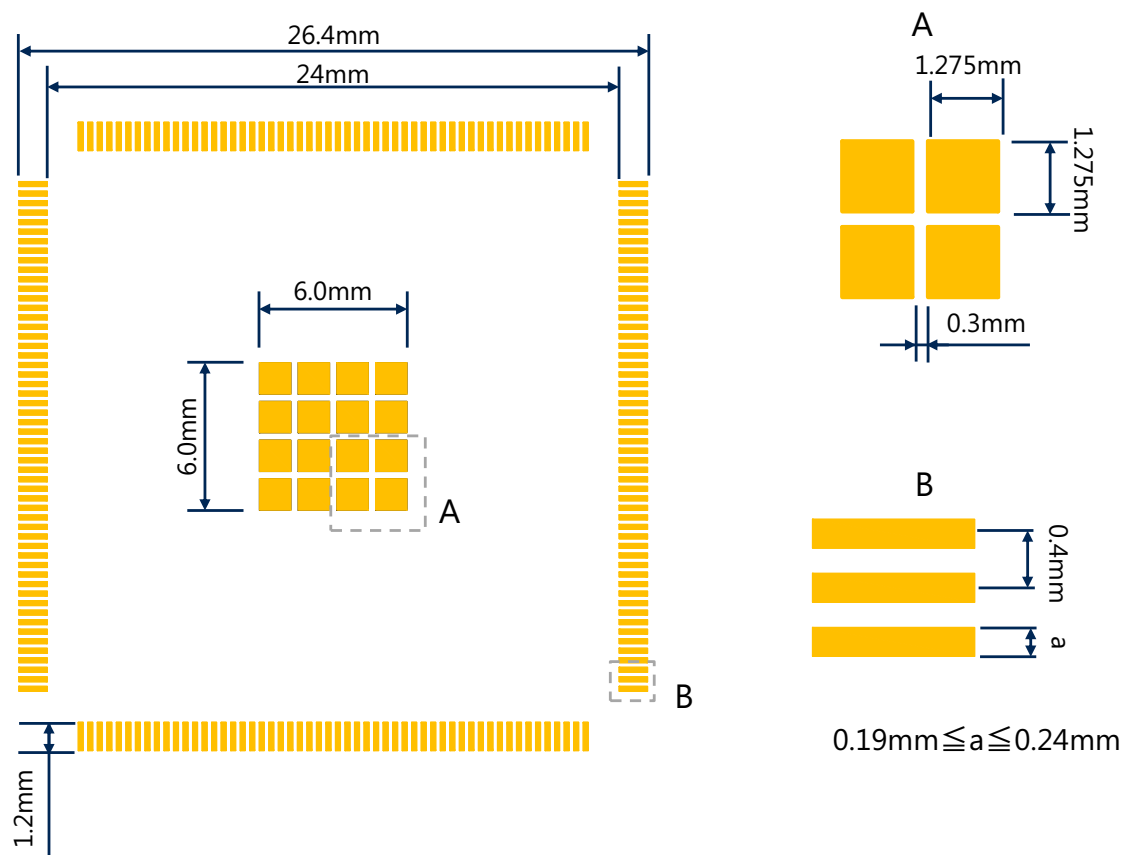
SC1701BH5-200/300 - Exposed pad soldering pattern
